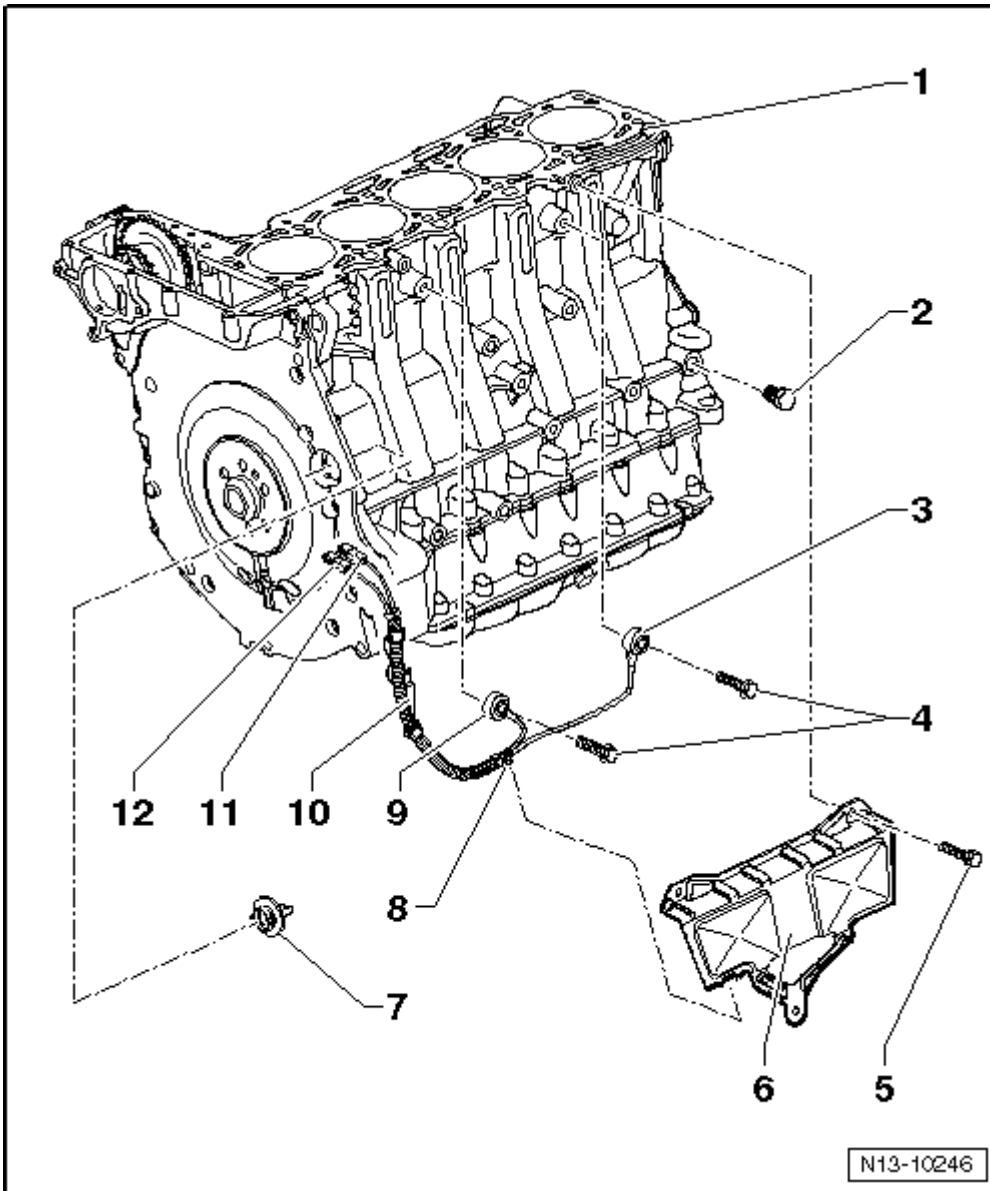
Attachments, Assembly Overview - Part III - Engine Rear
